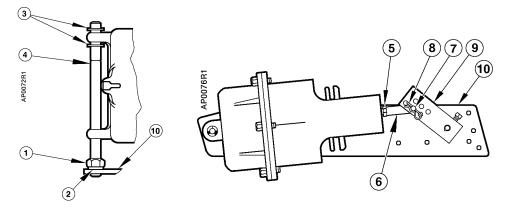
Extended Shaft/Frame Mounting Actuator Assembly.
